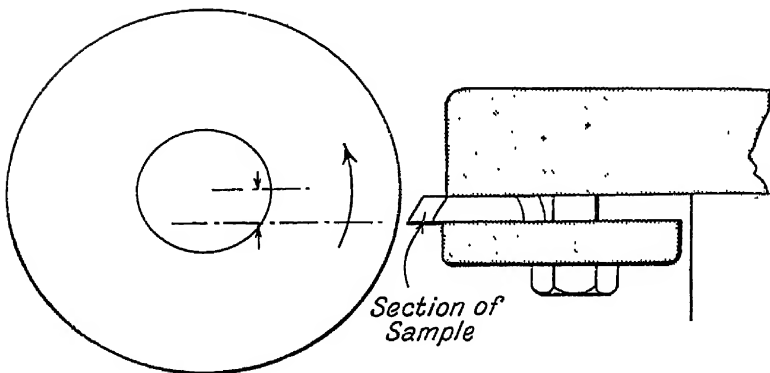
ANOTHER METHOD OF MAKING DISC AND FORM TOOLS
